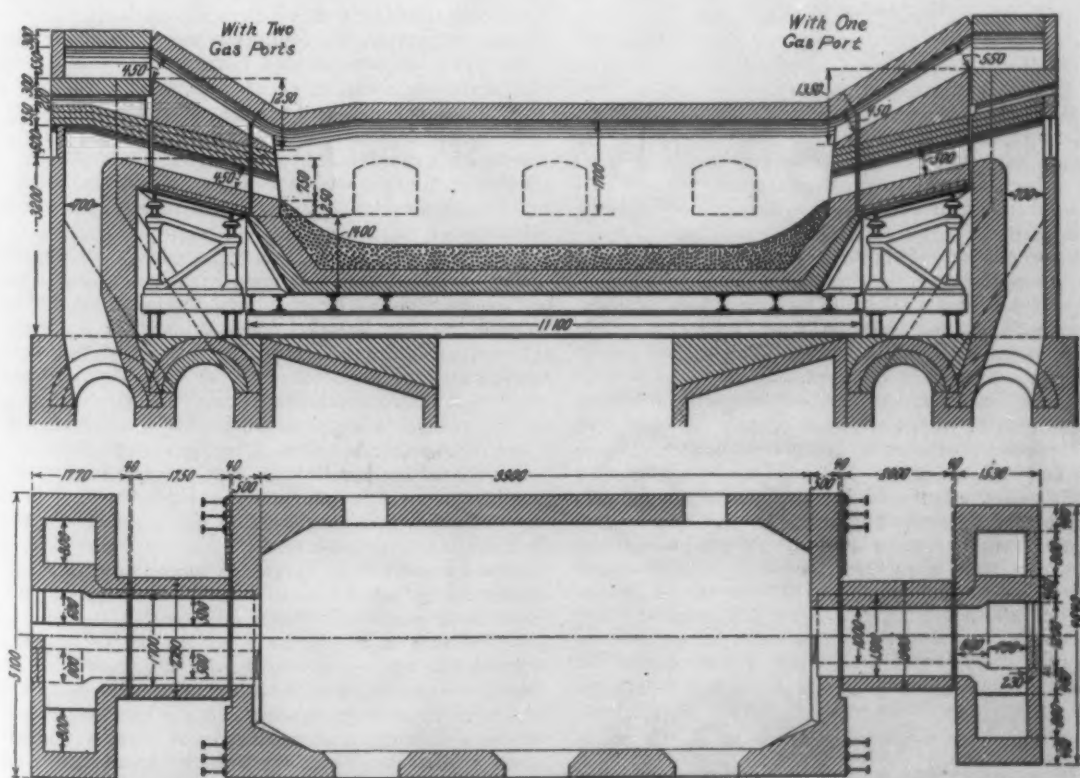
The Friedrich 50-ton Open-Hearth Furnace with Changeable Ports. Dimensions in Millimeters.
